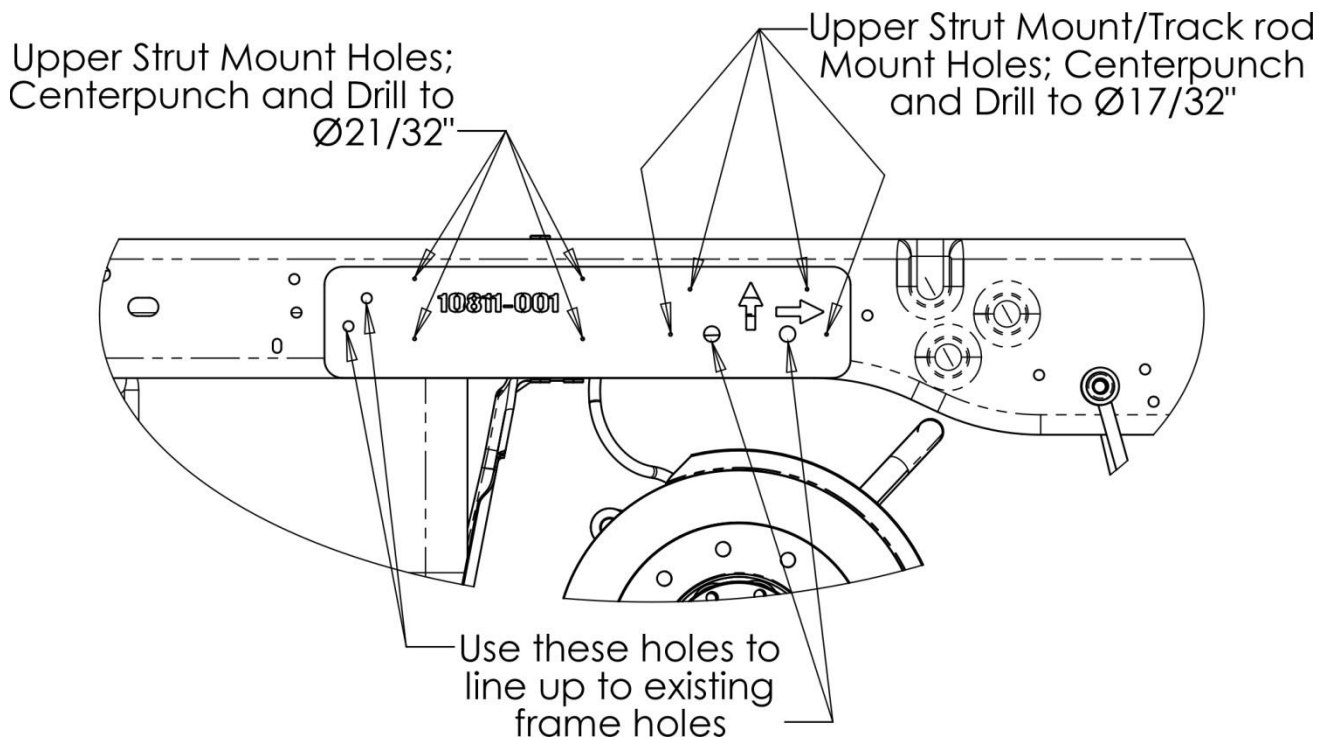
Passenger side template location for upper strut mount and track rod frame mount frame drilling.
